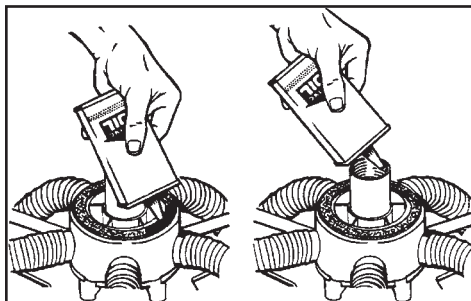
Lubricate Vacuum Seal on Top of Hub
